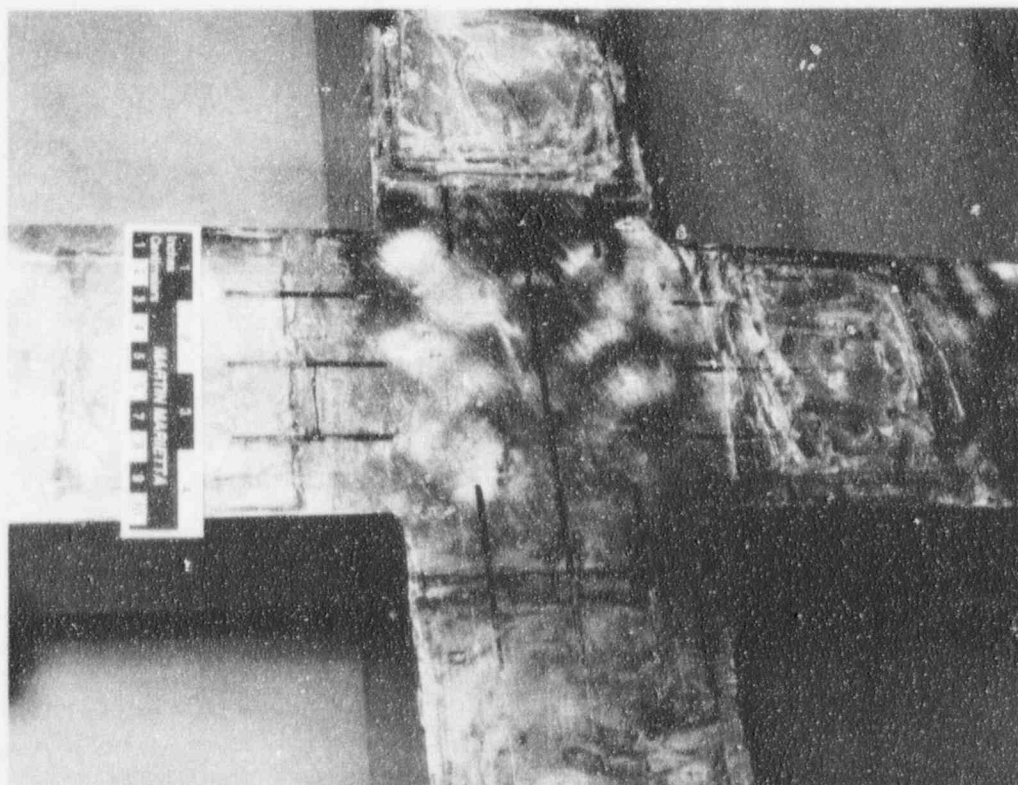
View of biaxial specimen BB-6 showing failed EB weld ligament
